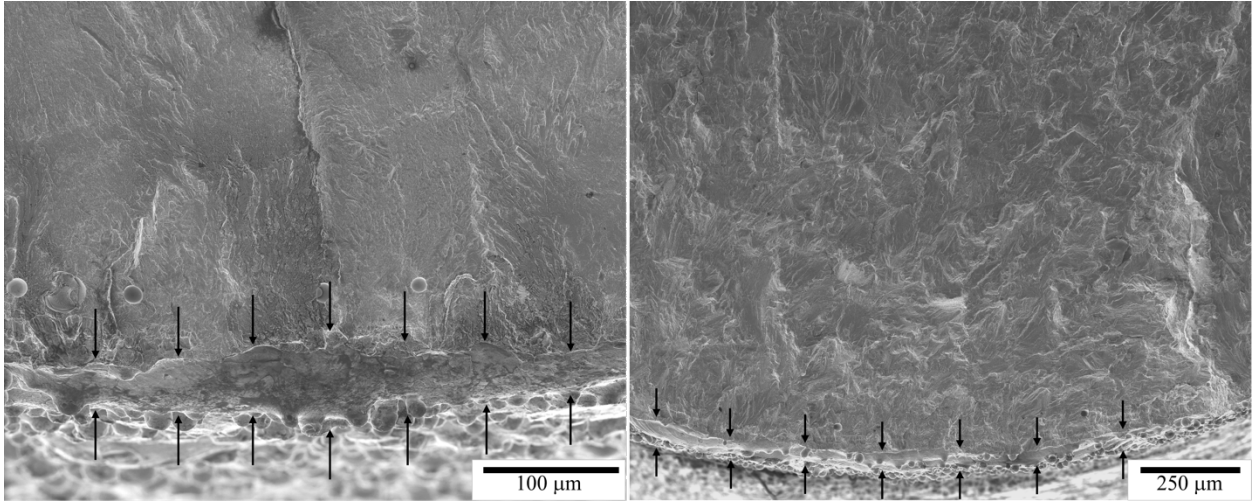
The fracture surface of two examples of surface crevice fatigue crack initiation in as-built, vertical CL M2 (CCV-au) specimens.
